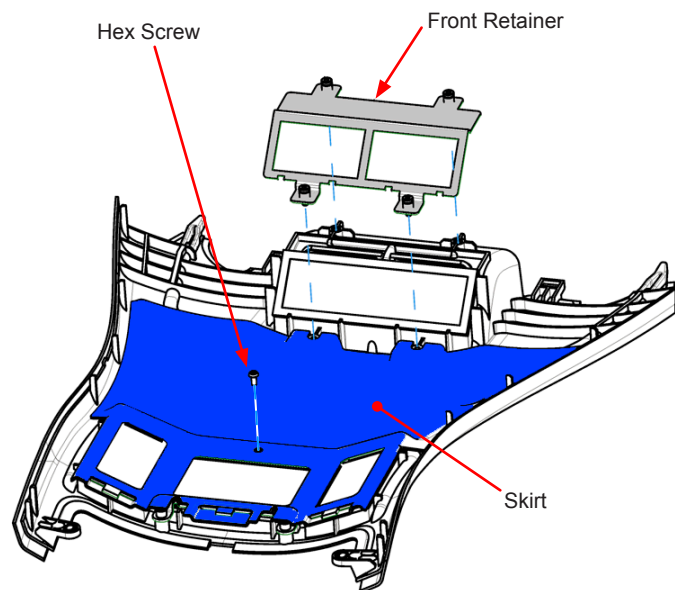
Lower Front Panel - Front Retainer and Skirt Removal
